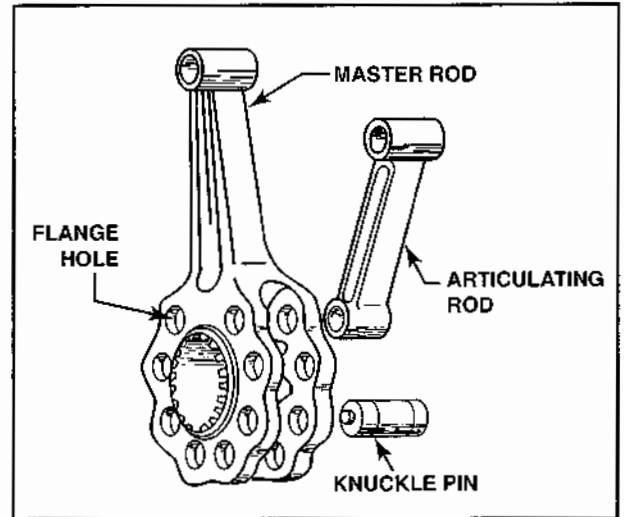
Articulated rods are attached to the master rod by knuckle pins. A knuckle pin lock plate retains the pins.
